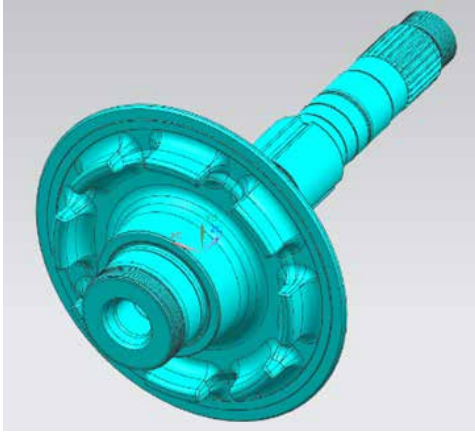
Integrated parking gear with bottomless teeth and fixed pulley half
